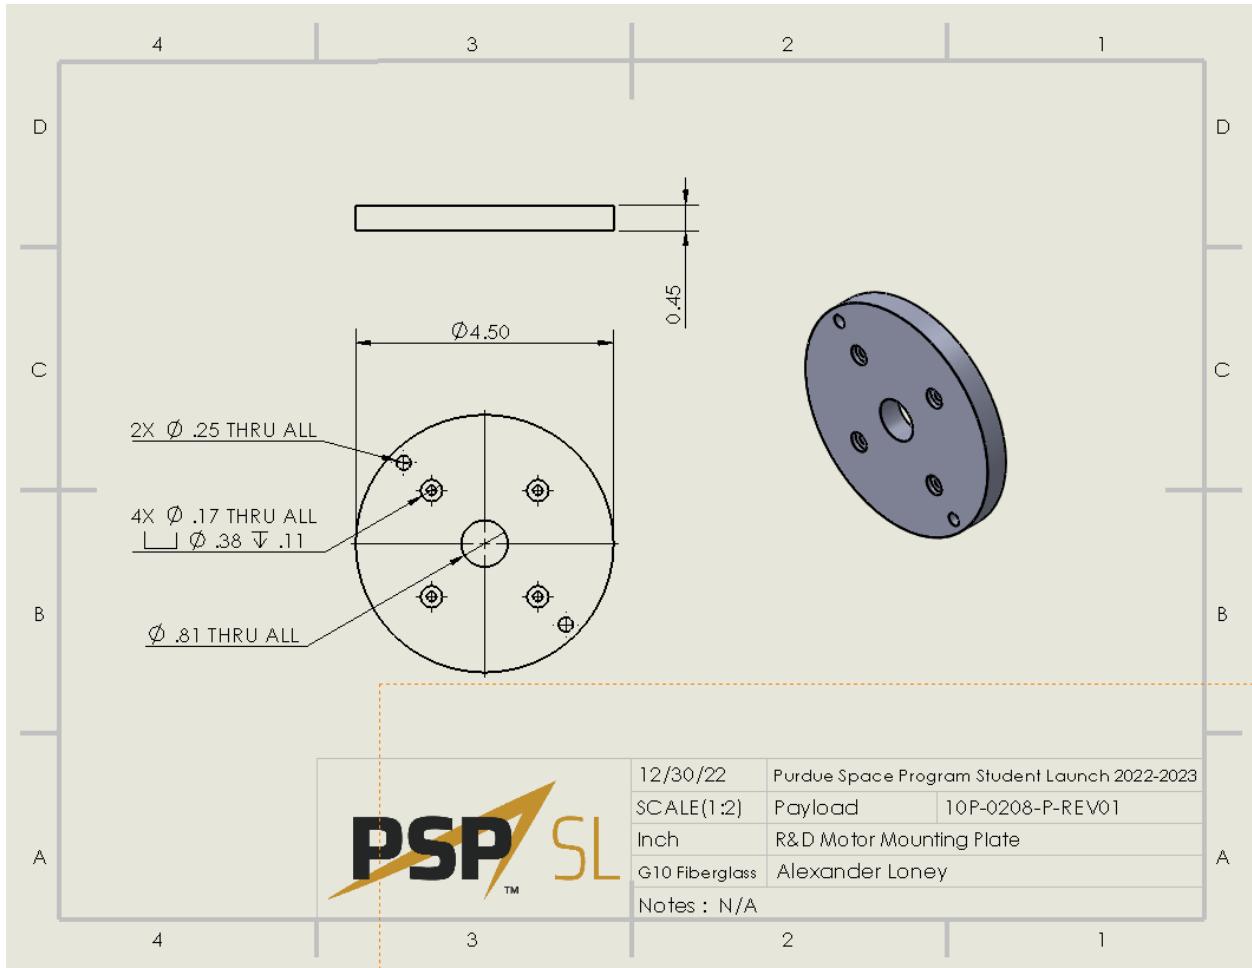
R&D Motor Mounting Plate Technical Drawing
